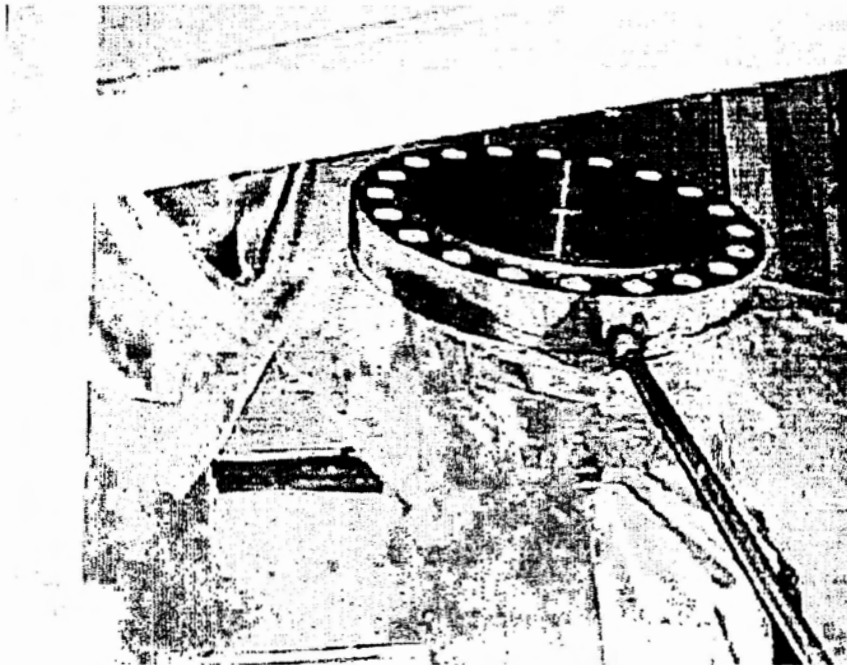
Welded diaphragm on the upper inspection port after passing final NDE
